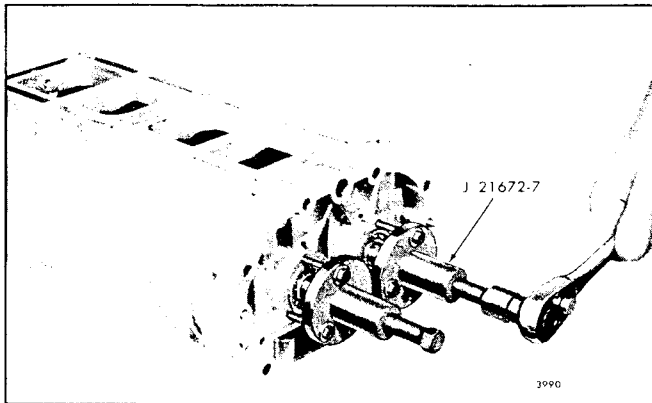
Removing Blower Rotors from Front End Plate Ball Bearings (Former Blower)
